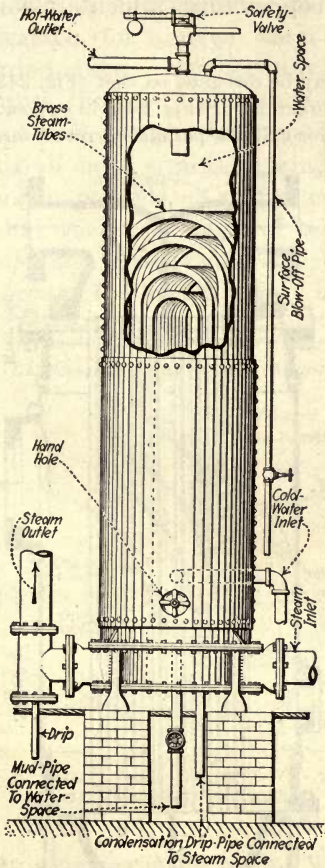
Steam-Tube Type Of Closed Exhaust-Steam Feed-Water Heater.
